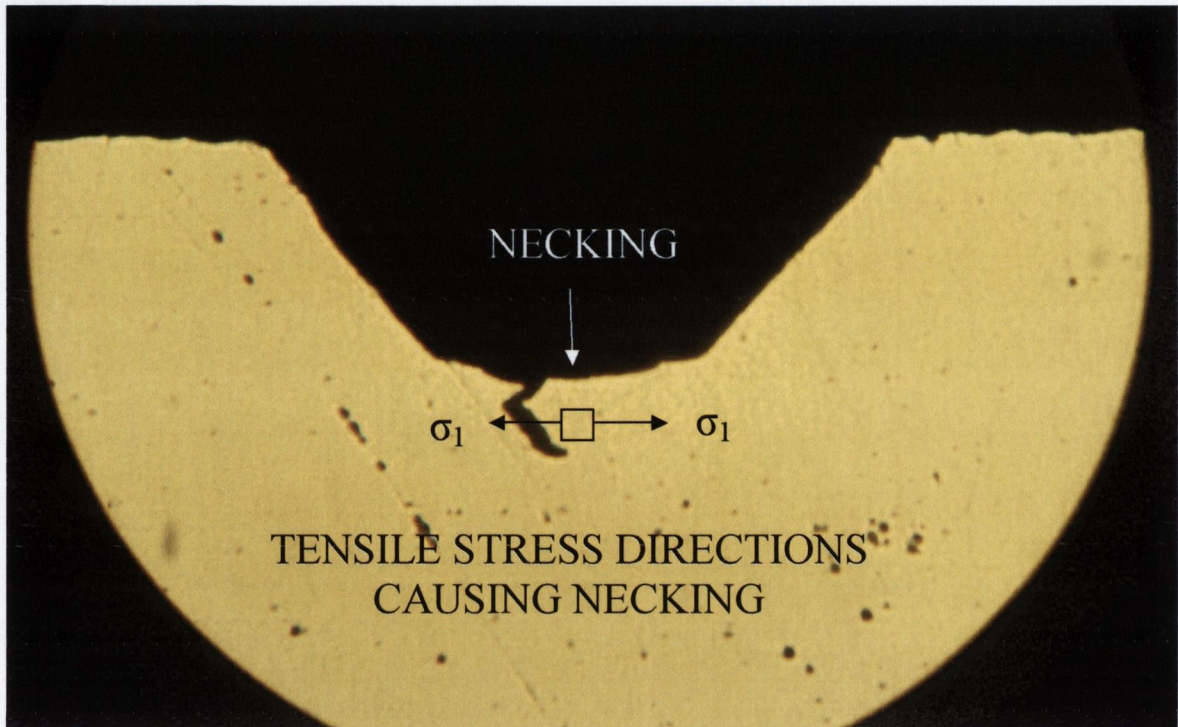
Location of necking in the second groove of the workpiece as observed in experimental testing.
